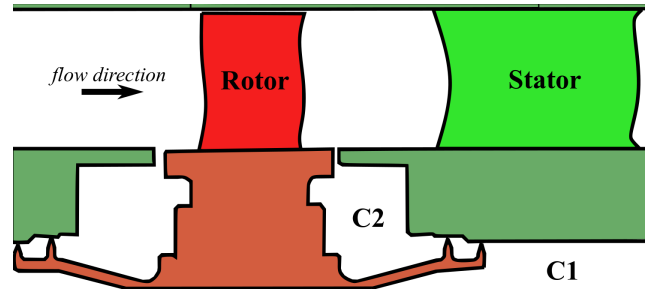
Cross section sketch of the H25 axial compressor stage - Rotor row and rotating assembly (in red), Stator row and fixed surfaces (in green) - C1 and C2 cavity volumes.
